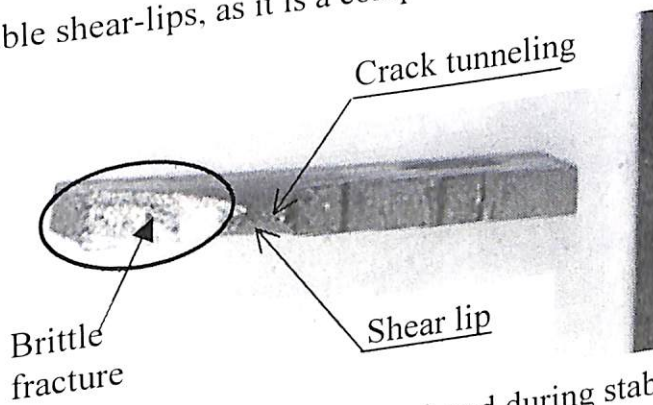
General features of fracture surfaces produced during stable tearing in EDD258.
